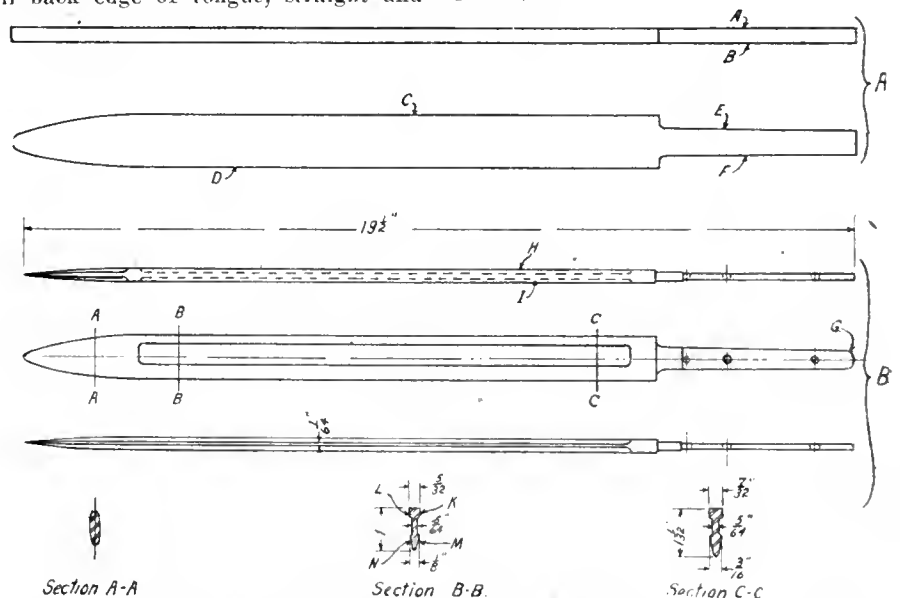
(a)—ROUGH FORGING. (b)—FINISHED BLADE.
